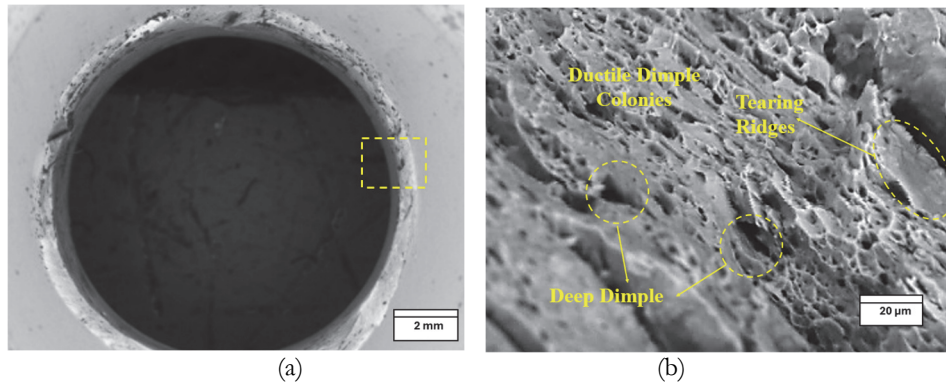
Fractographic examination of the fracture surface of as-received specimen.
